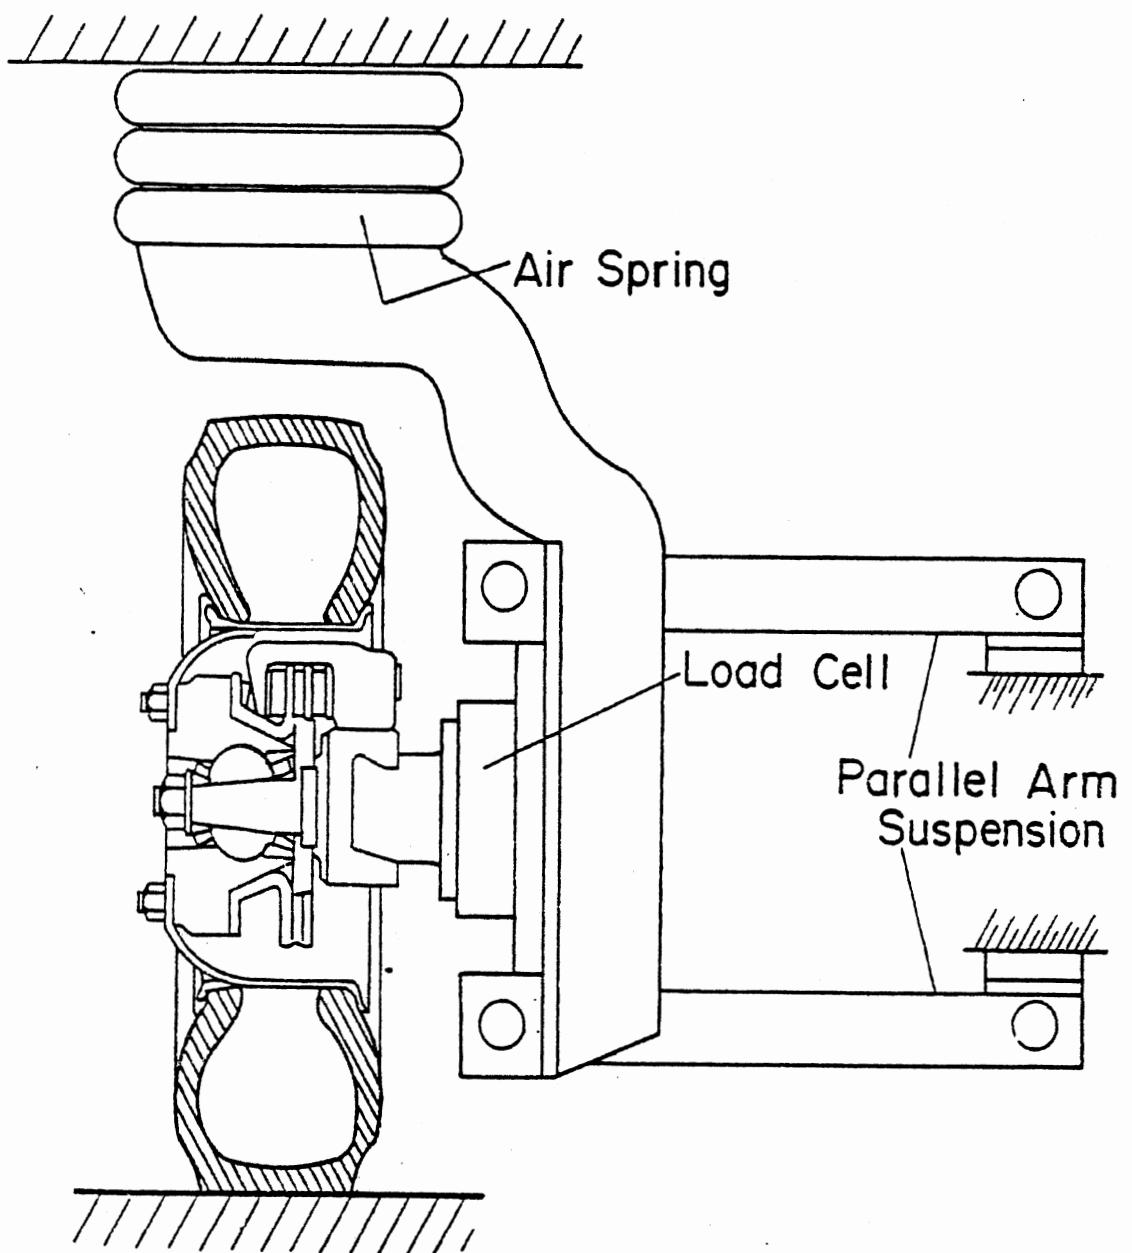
Test wheel suspension layout in the longitudinal traction measurement assembly.
